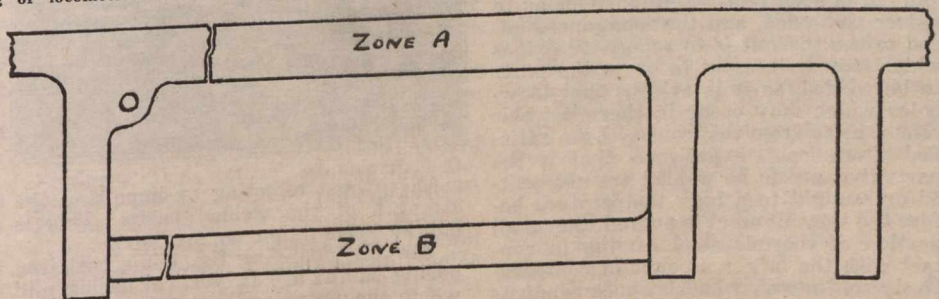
Welding of locomotives 405 and 634.
